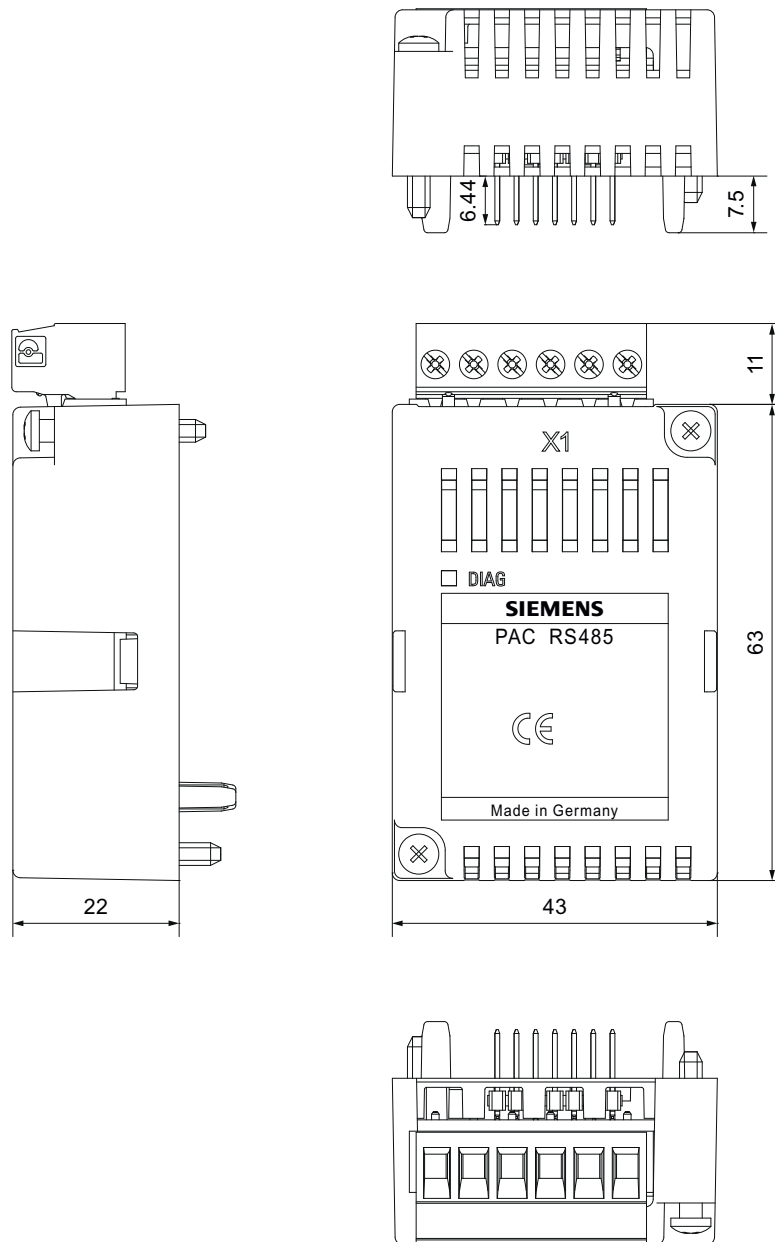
View from above with the dimensions of the plug connector between the PAC RS485 expansion module and the SENTRON PAC, side view, front view and view from below with terminal block
